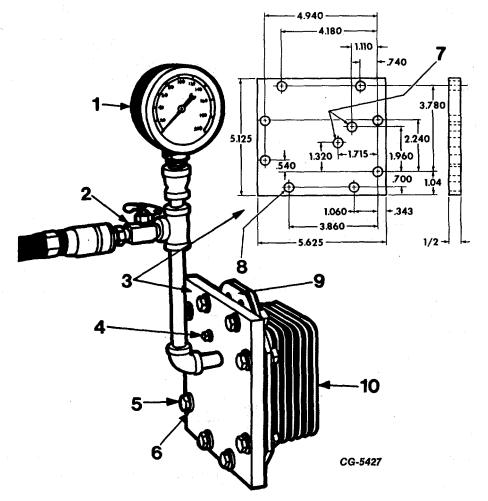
Pressure Testing Engine Oil Cooler Core Assembly
